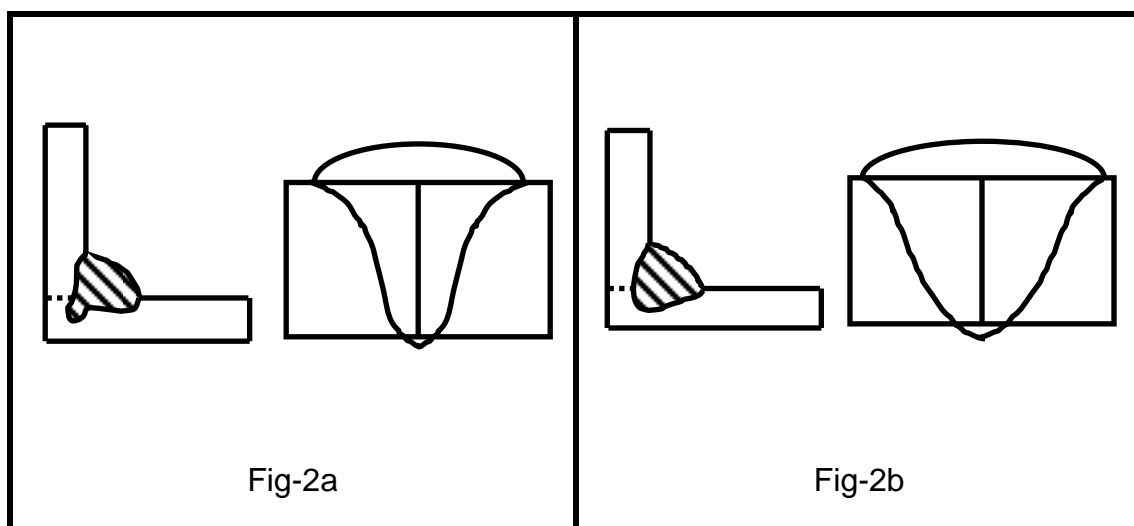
Nugget profile along the cross section of a weld bead made with a) solid wire & b) metal cored wire. Solid wire shows “deep finger” penetration.
